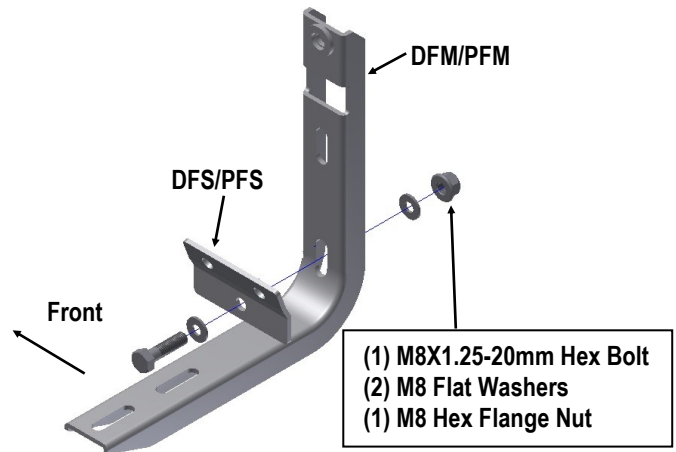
Insert the M8 Bolt Plate (Use the 2nd, 4th, 6th, 8th holes)
